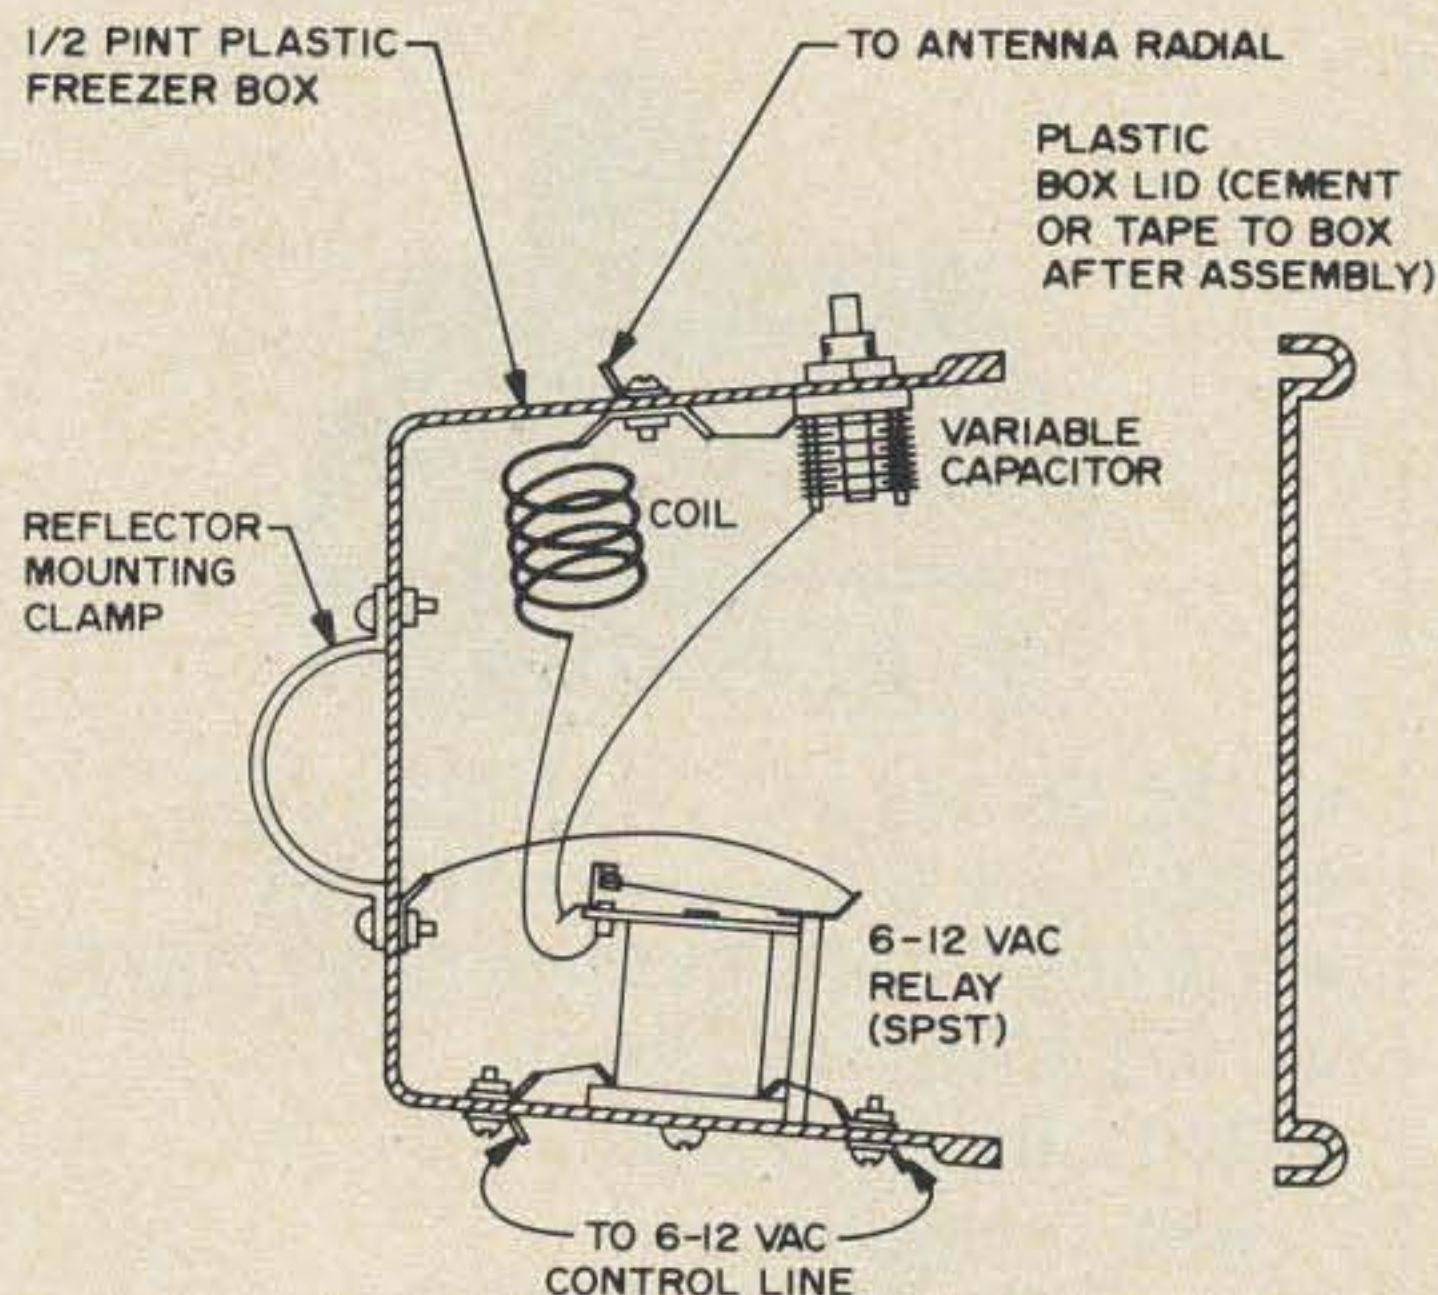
Typical weatherproof box assembly for reflector tuning components.
